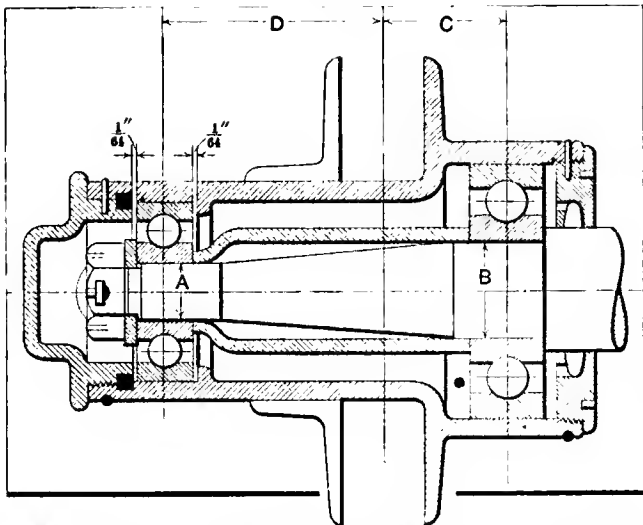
Annular type of ball bearings for slide chain drive rear axle
